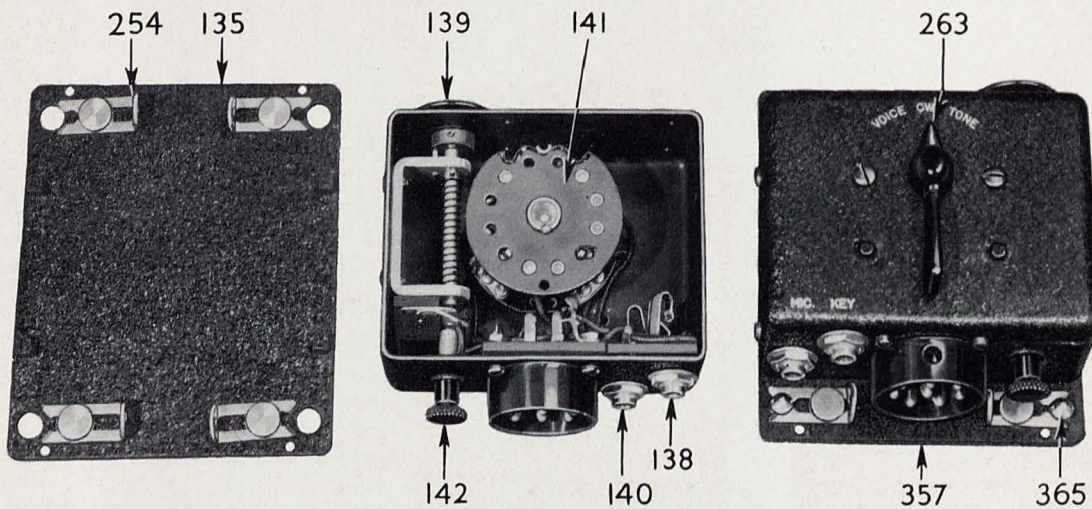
RADIO CONTROL BOX, TYPE BC-AE-232 WITH BASE REMOVED AND WITH BASE AND MOUNTING, TYPE FT-118 IN PLACE
